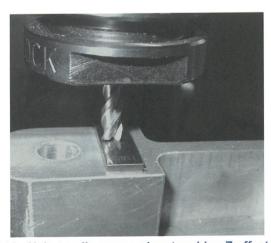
Using a slip gauge when touching Z offset on a mill
